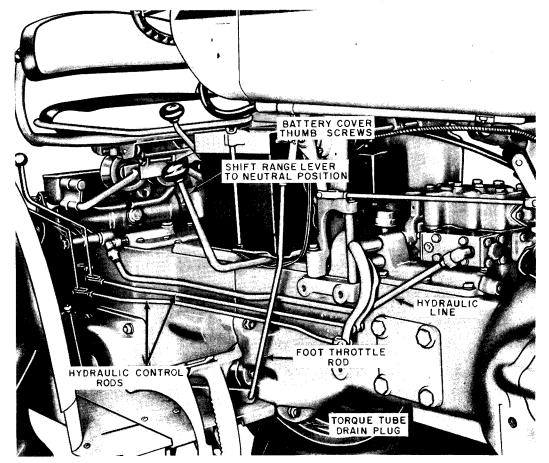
Items To Be Removed When Splitting Tractor At Rear Of Torque Tube
